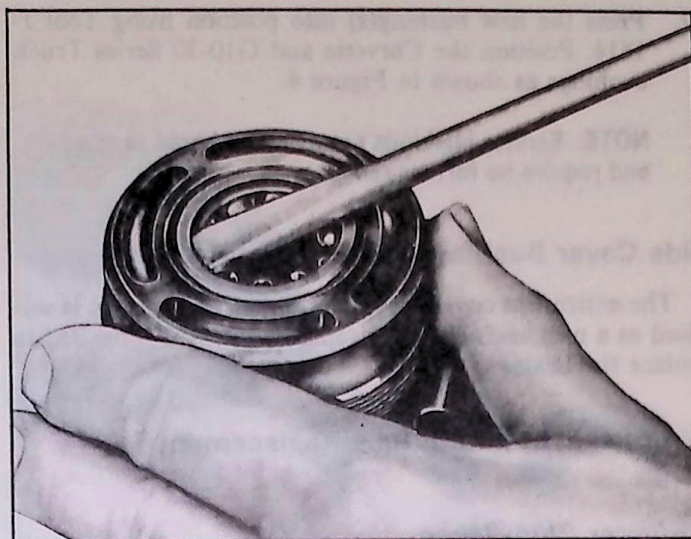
Removing Lower Bearing Retainer—Except Corvette
